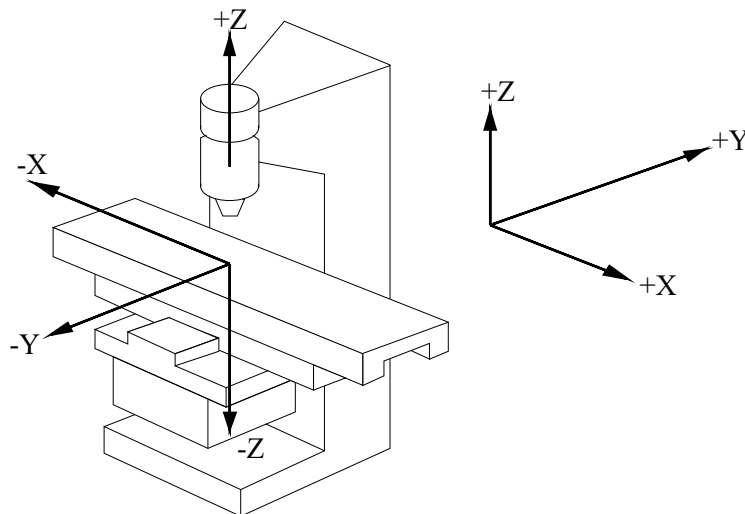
3-D Coordinate System (Milling Machine Type 2)
